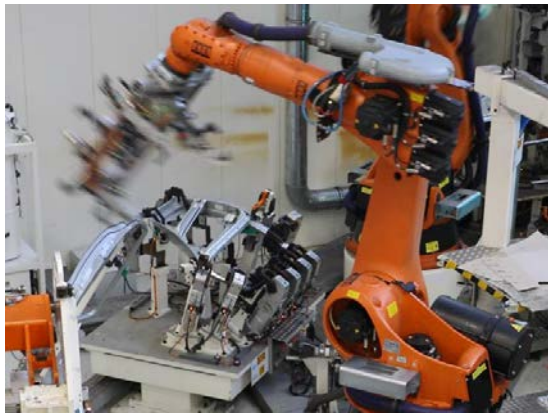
Body shop fixture with rigidly arranged clamps and positioning elements [3]
